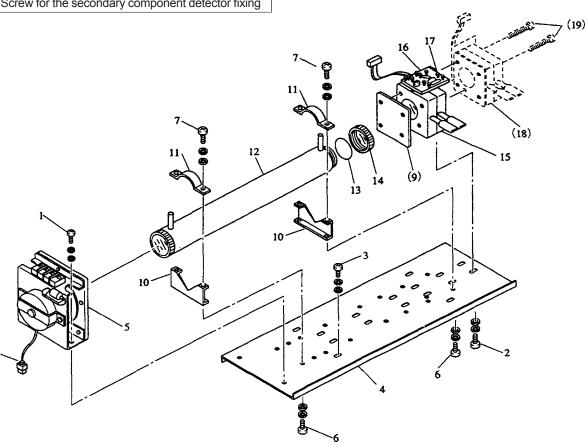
Exploded view of measuring unit (Pipe cell)
